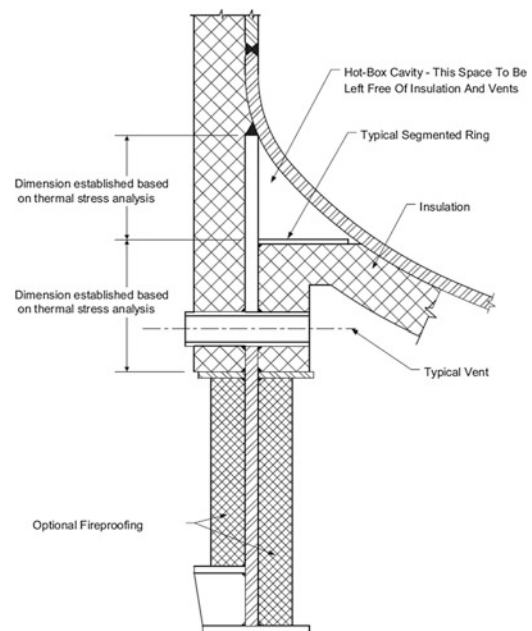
Hot Box at Bottom Head/Skirt Insulated. (Source: ASME PCC-2/ASME Sec. VIII, Div.2, Fig. 4.15.8)
